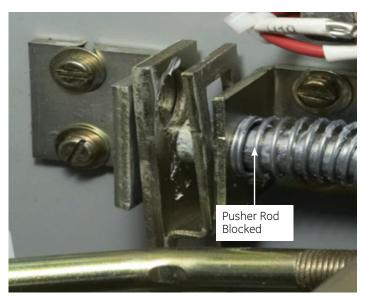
View of blocked Pusher Rod when the contactor is closed.
